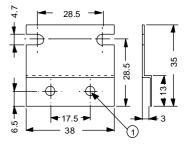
Mounting plate BKT116-1 (single) 1. mounting holes For P20 Ø 4mm
